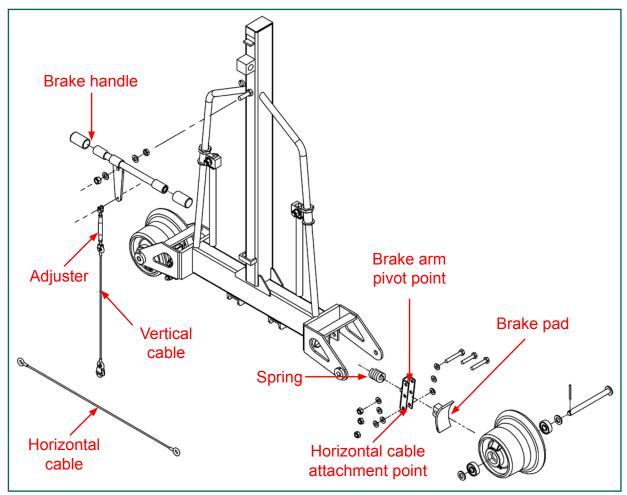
Exploded view of ironman braking system (courtesy Permaquip)
